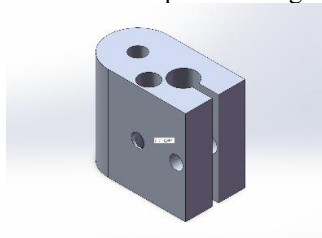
Three-dimensional view of the heating block (Picture credit: Original)
